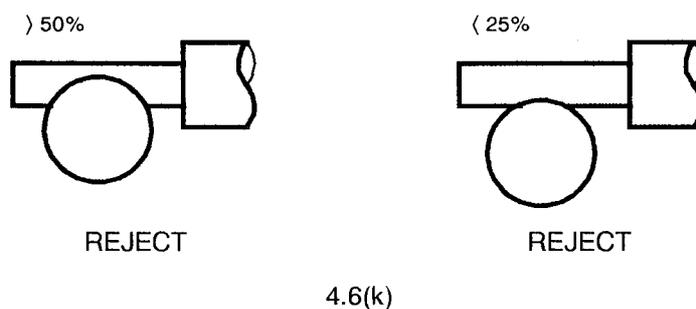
FIGURE IV - FRAME TO HEADER WELD (CROSS SECTION)
